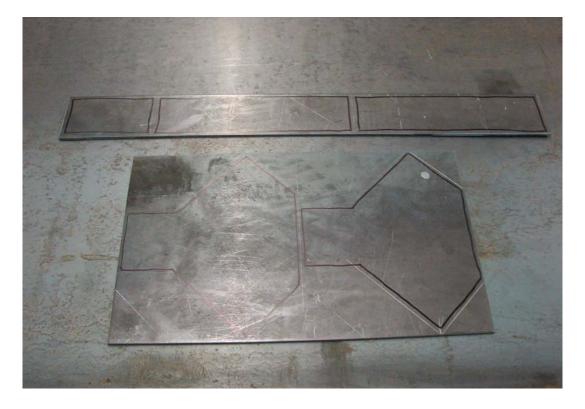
Parts cut into two blocks. Notice a permanent marker was used to outline the part edges just inside the scribed lines. This will make locating the cut lines easy.
